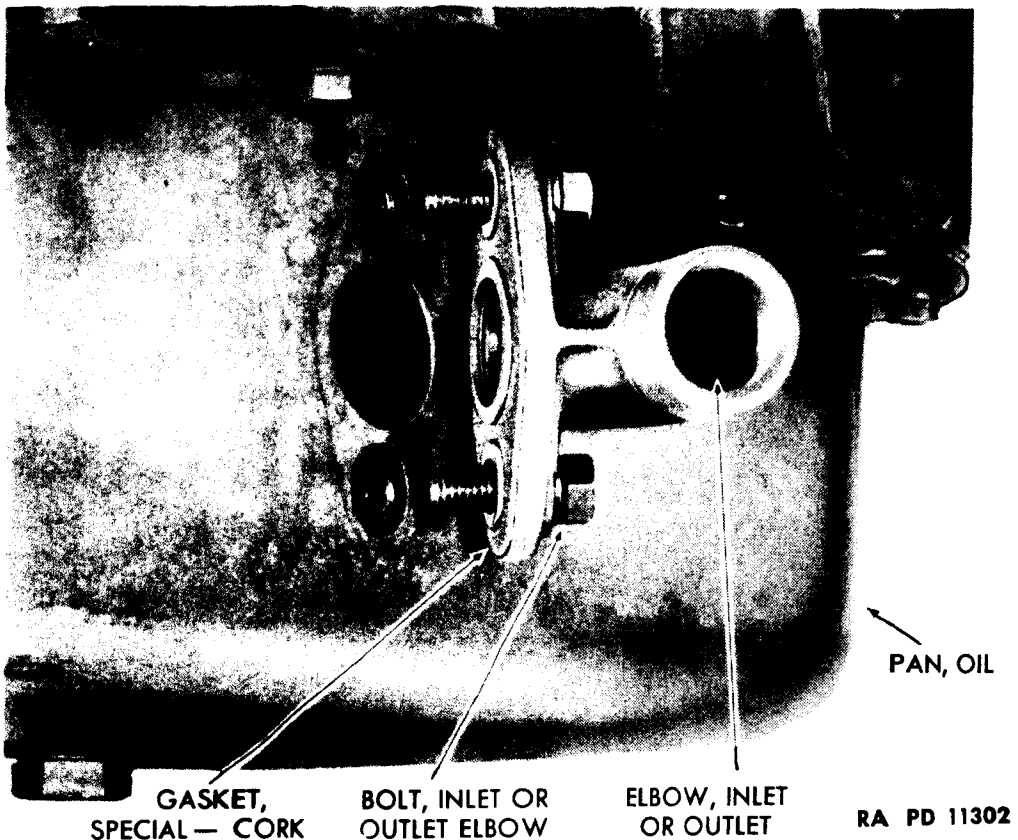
Installing Oil Pump Inlet or Outlet Elbow
